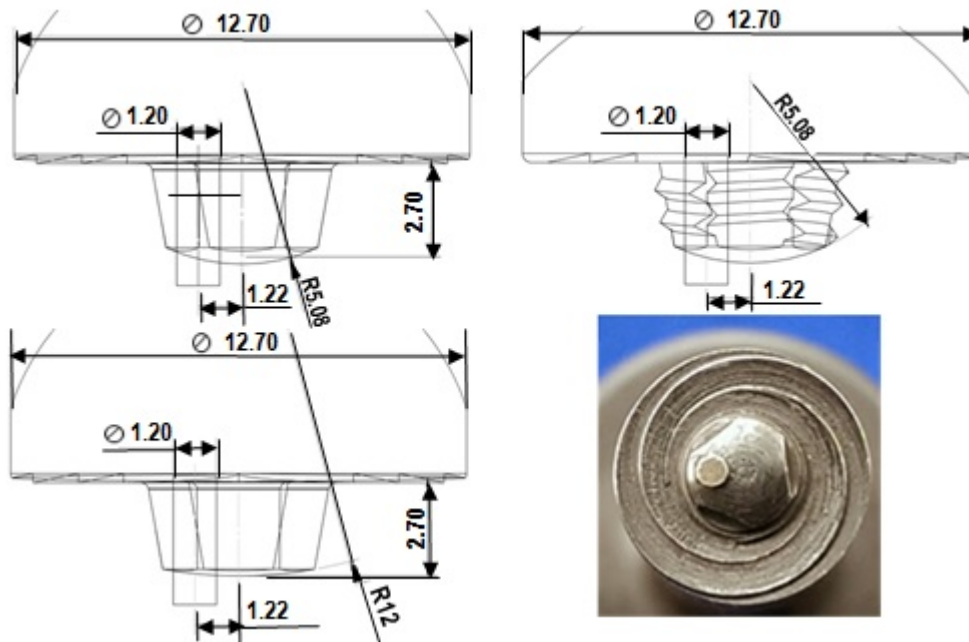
Tool geometry and feature variation considered for the project. Top view of a typical friction stir scribe tool is shown on bottom right corner.
